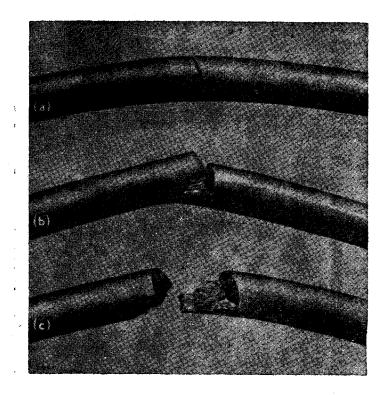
STAGES IN THE BREAKING OF A WIRE AT A FATIGUE CRACK
